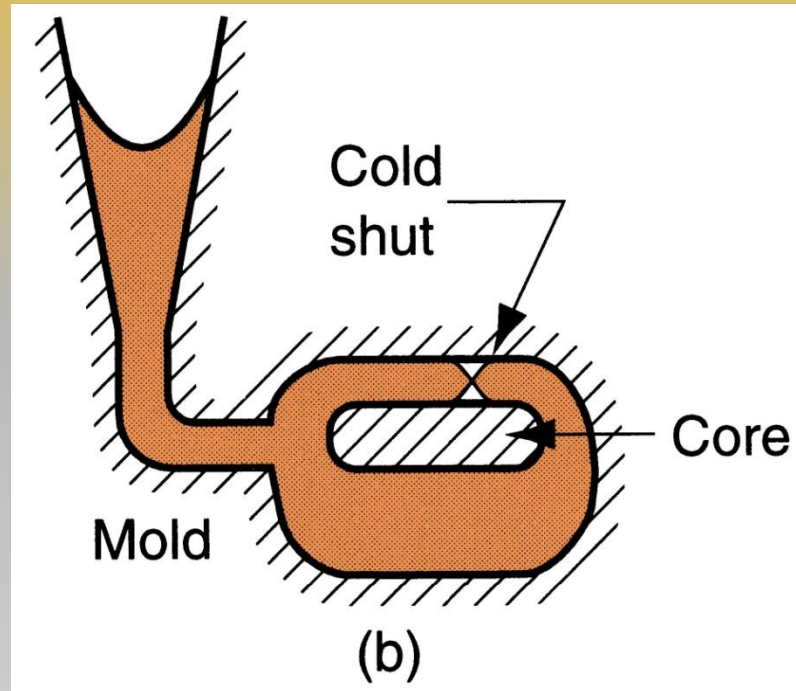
Some common defects in castings: (b) cold shut
